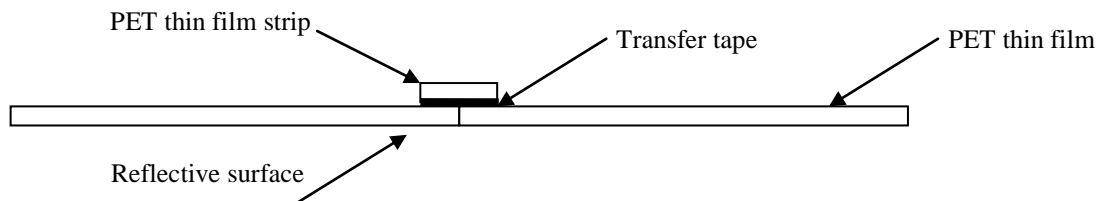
Lap joint used to assemble gores in parabolic dish reflector
